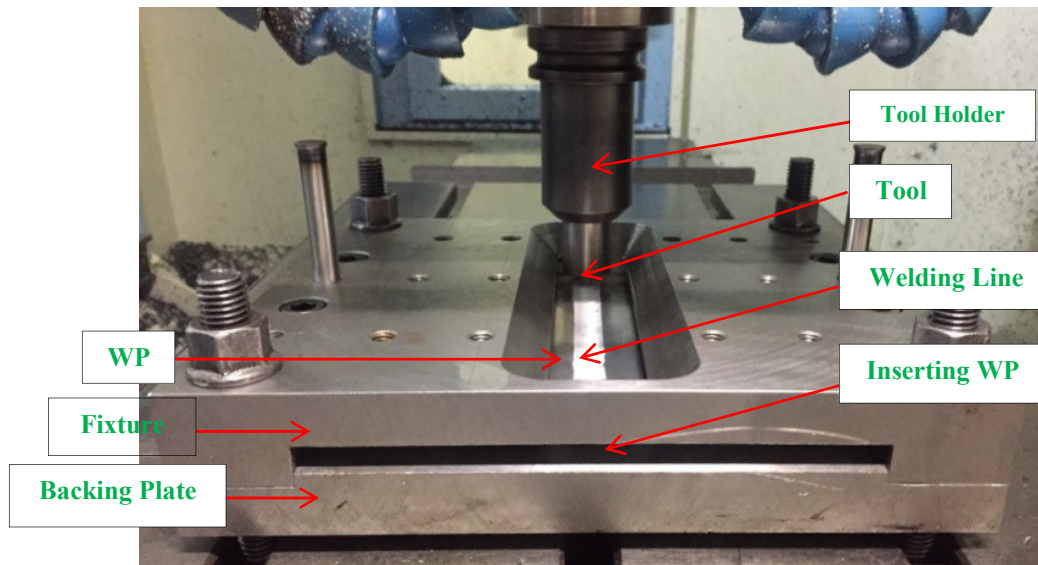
Set up the backing plate, fixture, and WP in the CNC milling machine
